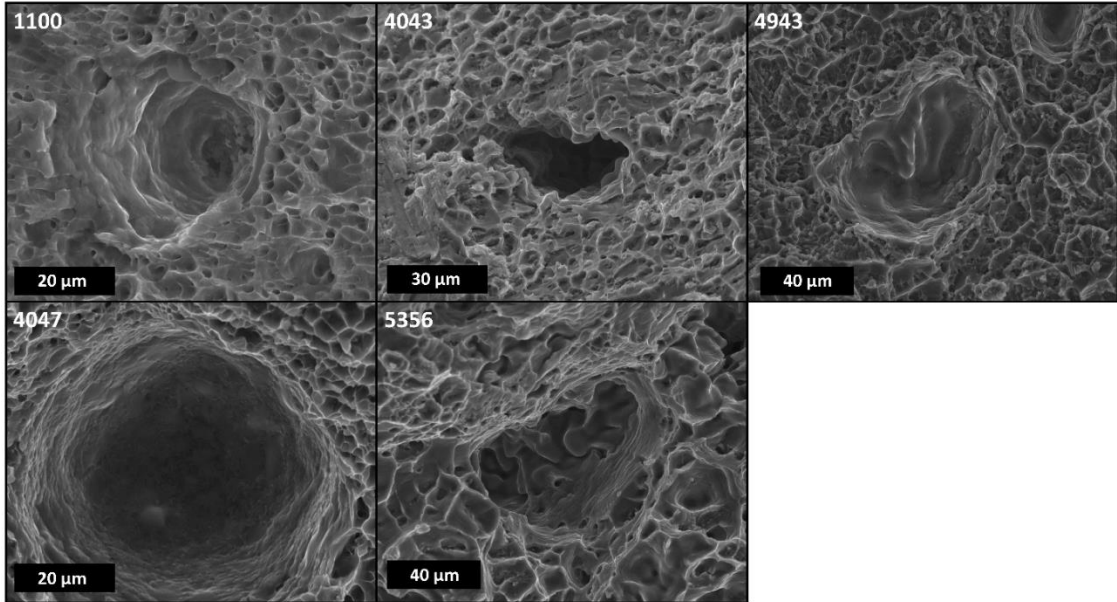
Examples of porosity in each 3-D printed aluminum alloy.
